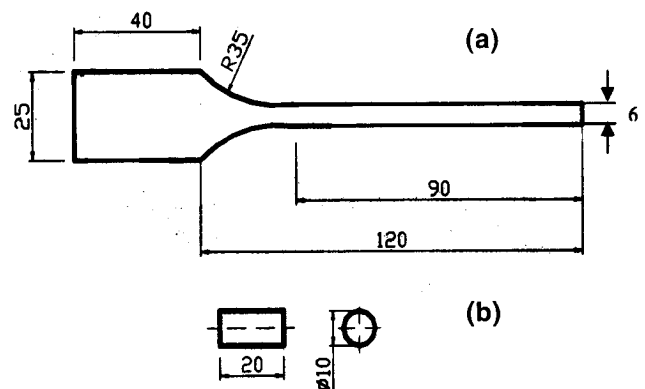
Geometry of (a) bending specimen (thickness = 6 mm) and (b) contact pad. (All dimensions are in mm).
